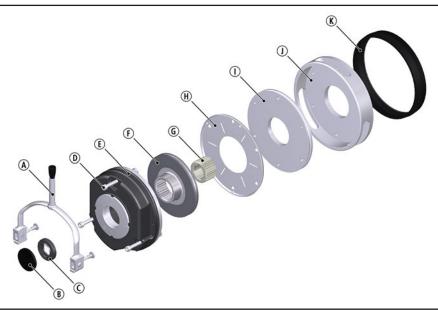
Spring-applied brake INTORQ BFK458-06 to 25
